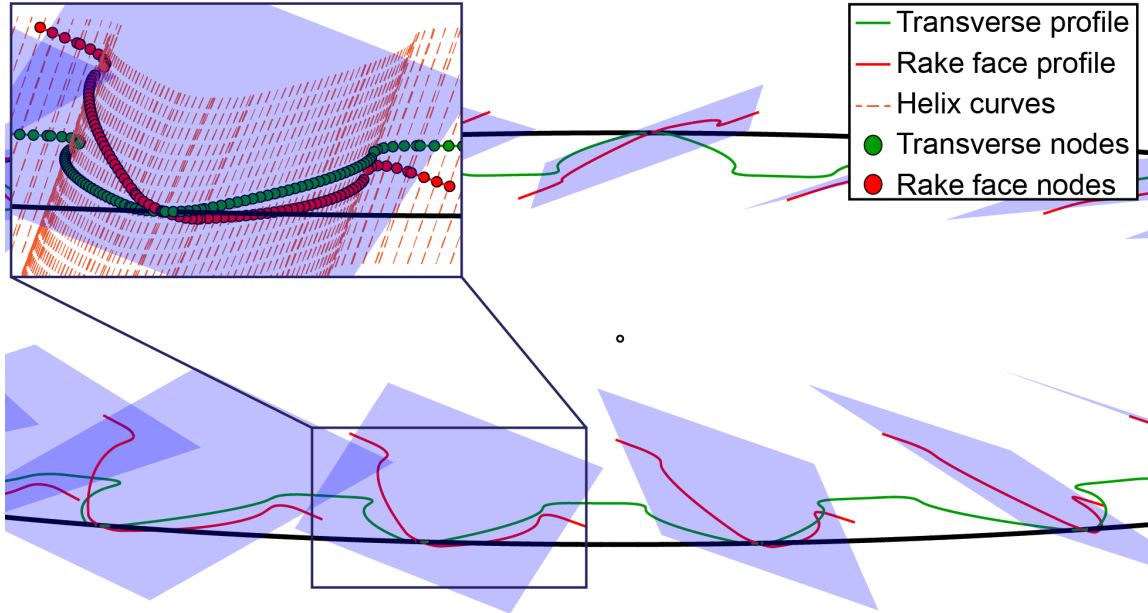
Generation of the cutting edge of a helical power skiving tool.
